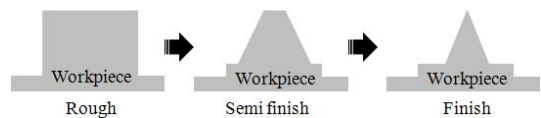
A machining step of workpiece shape with each cutting process in FFD process
